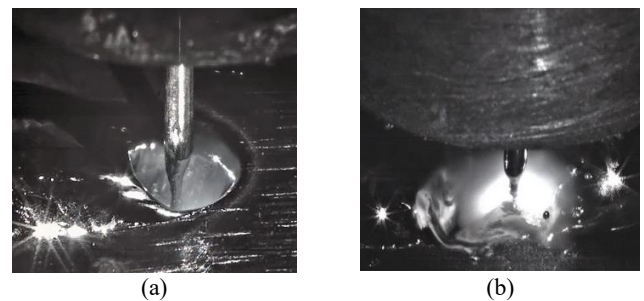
DynaFlex-Arc: In (a) In buried arc with 30 V, 430 A, wire feed of 15 m/min, and welding speed of 170 cm/min (Silva, R. et al., 2023); (b) In cladding with 32.5 V, 270 A, wire feed of 13.5 m/min and welding speed of 60 cm/min (Schaeffer, et al., 2024).
